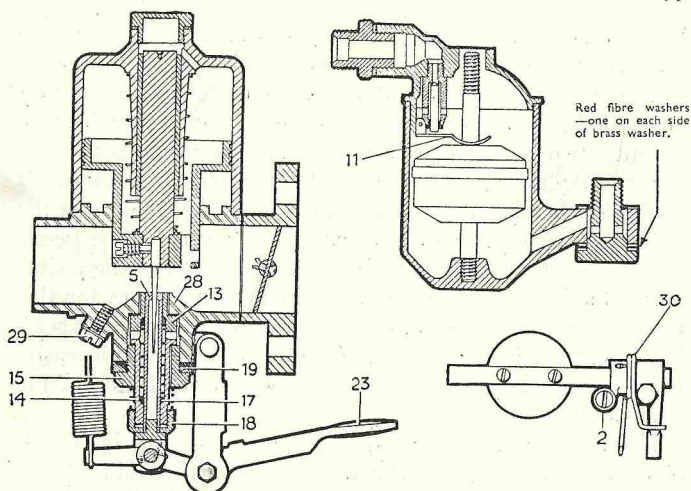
SECTIONAL VIEWS OF S.U. CARBURETTER, TYPE MC2.
